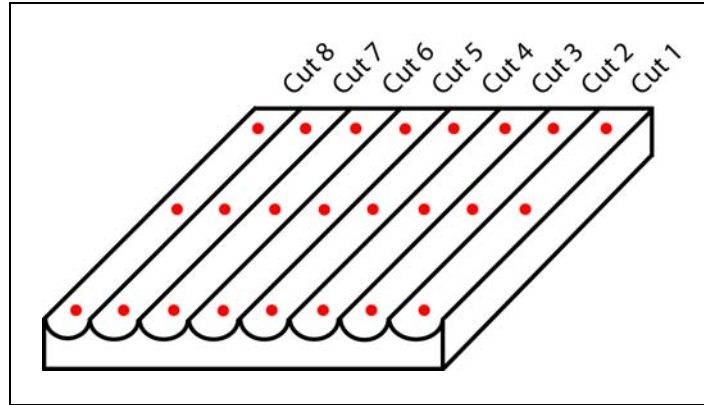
SEM scheme for machined surface using ball nose end mill.
